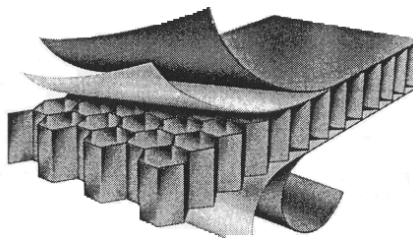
TYPICAL SANDWICH COMPOSITE CONSTRUCTION FORM
